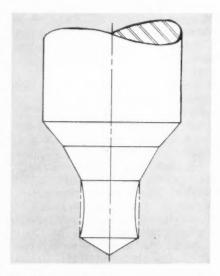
An enlarged view of one cutting end of the combination center drill illustrated in Fig. 10 is presented herewith.
